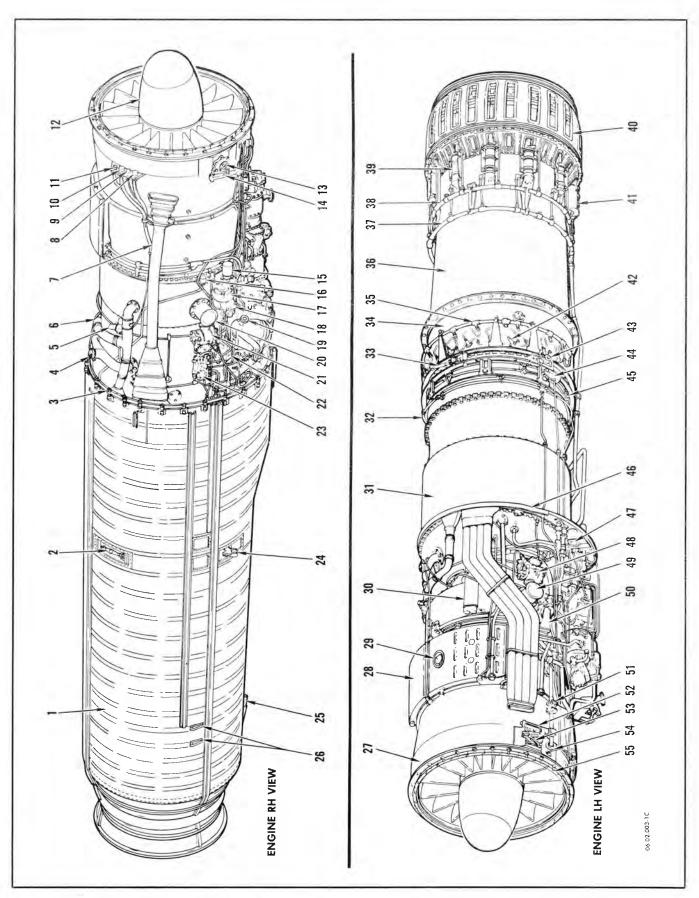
Engine Assembly (Sheet 1 of 2)
